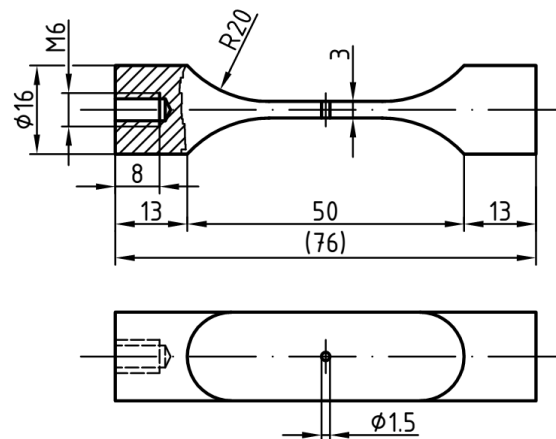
The shape and dimensions of the fatigue crack growth test specimen
